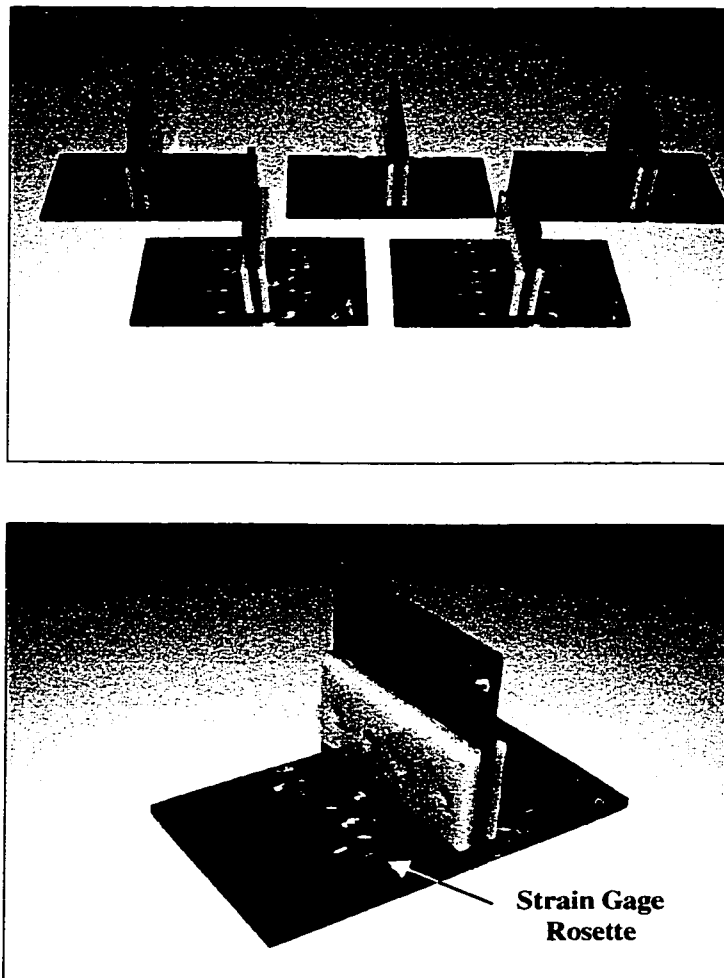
Typical T-300/PR520 T-Joint Rail Shear Specimen: (a) Specimen Set and (b) Typical Specimen Showing Instrumentation.
